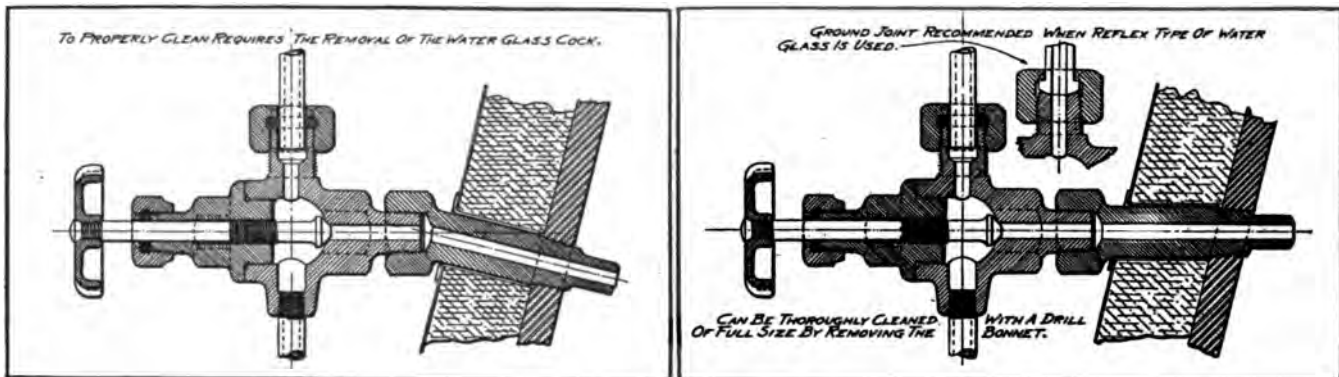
SHOWS DETAILS OF GAUGE COCKS
